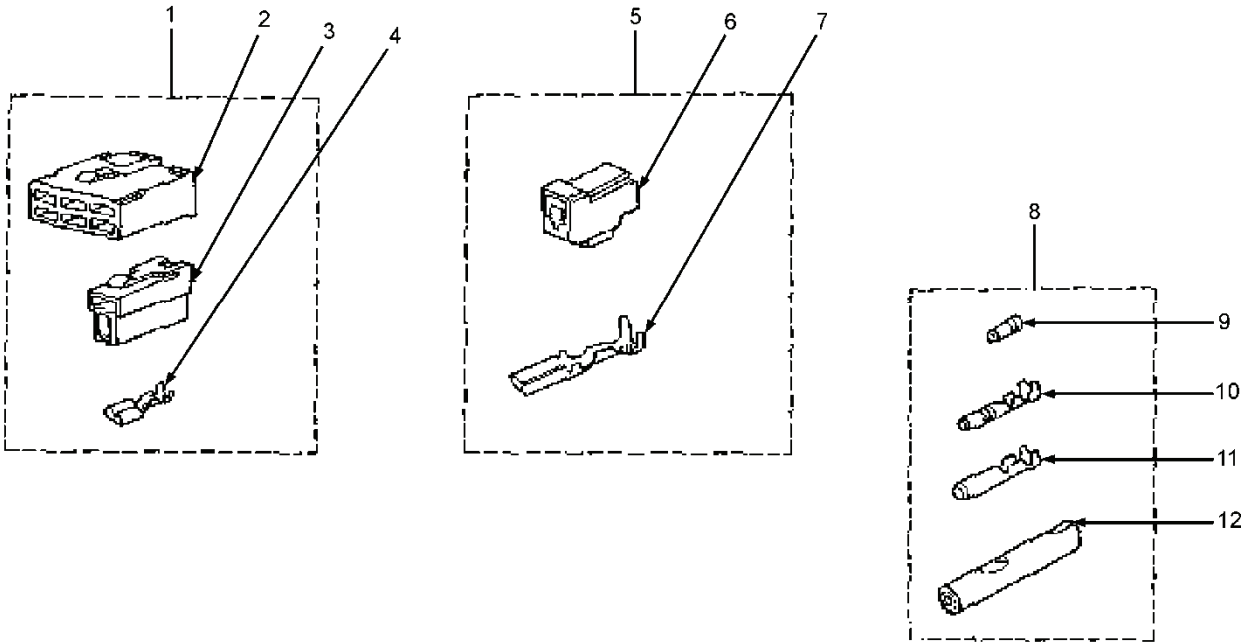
ACCESSORIES AND SERVICE PARTS
